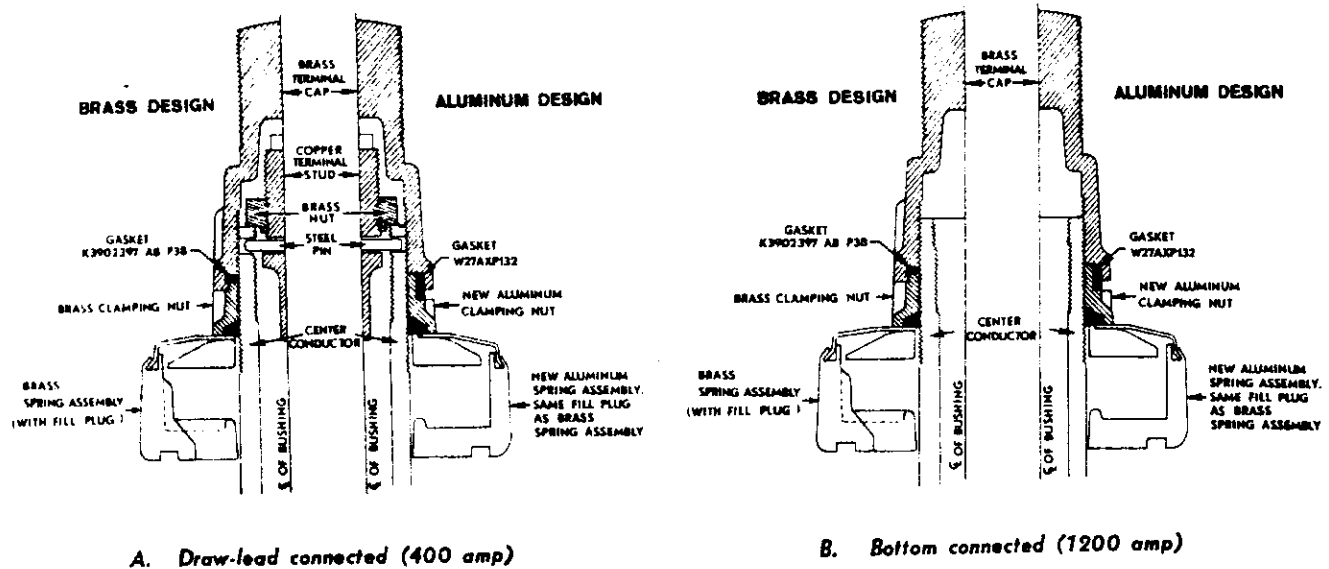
Top end construction for 400/1200 ampere, Type U bushing
